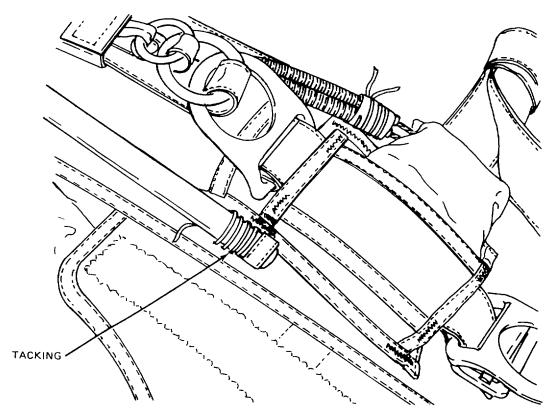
Main Ripcord Housing, Upper Tacking Removal.
